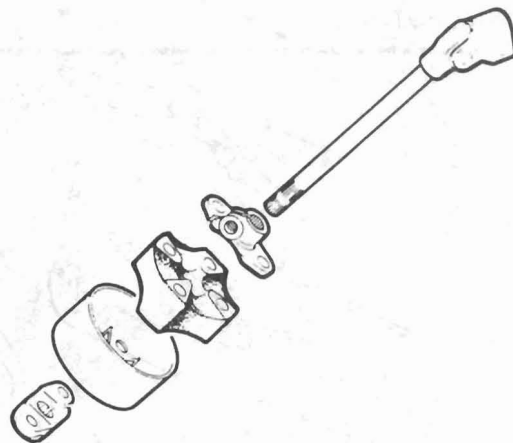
Steering intermediate shaft and flexible coupling (early models) (Sec 22)
